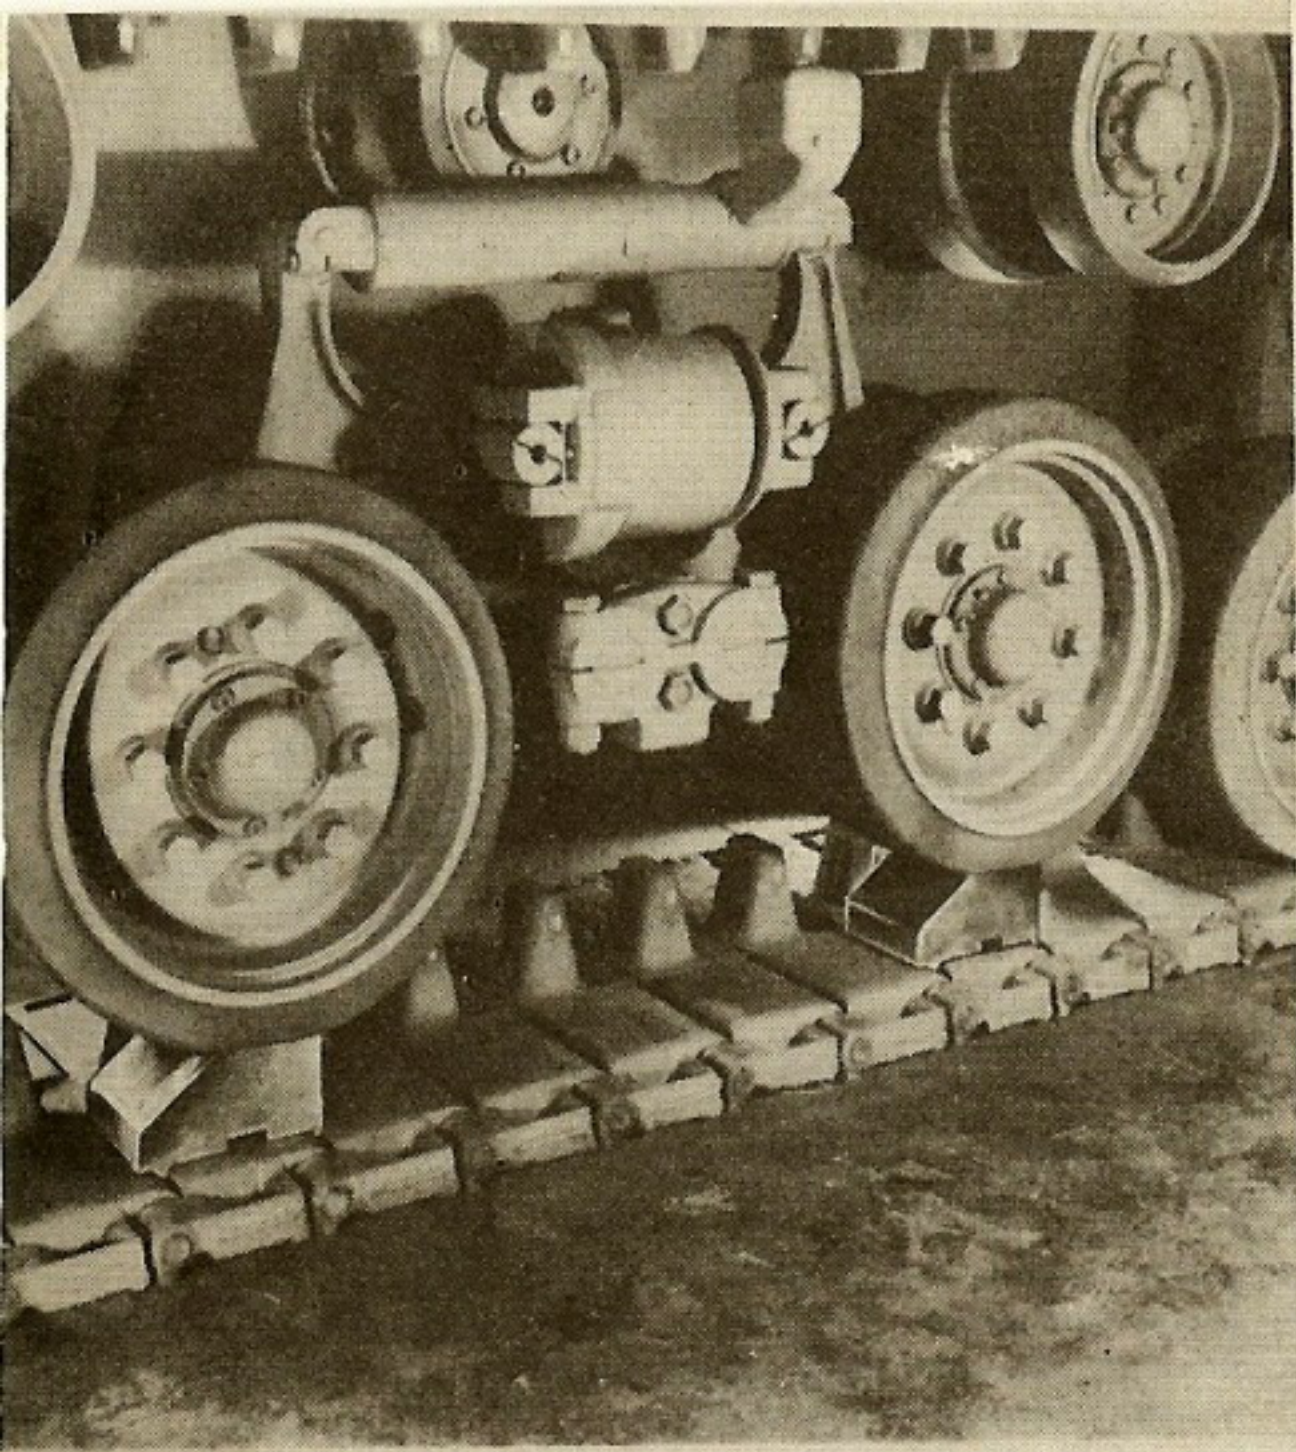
To remove the volute spring, first loosen one wheel-bolt on each wheel of the bogie assembly involved. Place riser blocks, one in front of each wheel of the center bogie-assembly, and hunch the tank forward until the bogie-wheels center on the blocks as you see them here.
